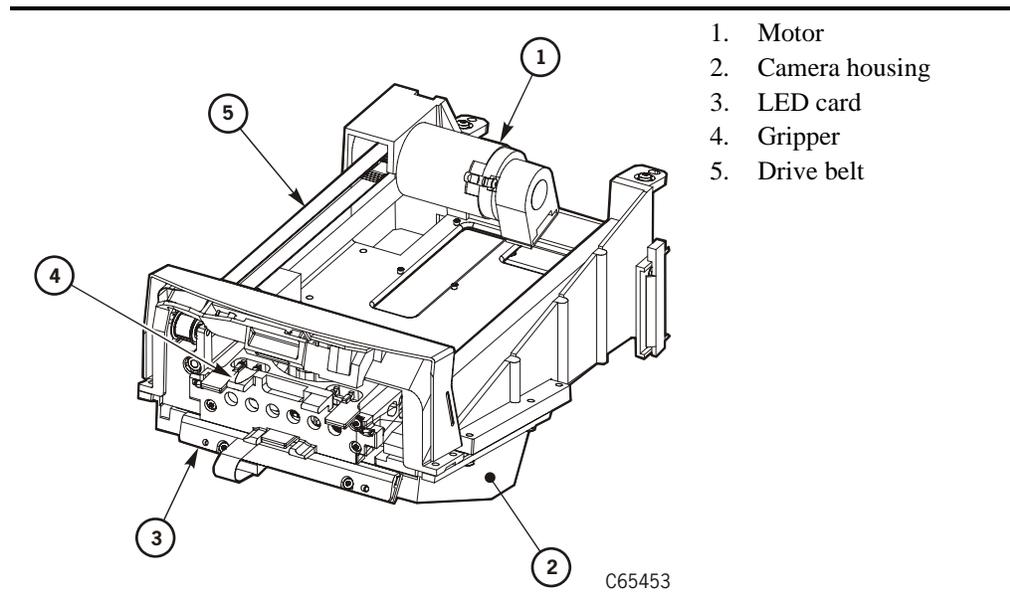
shows the hand-camera assembly which consists of a gripper, a motor-driven drive belt for gripper extension, and a bar code scanner card and camera (enclosed in a case under the hand components).
